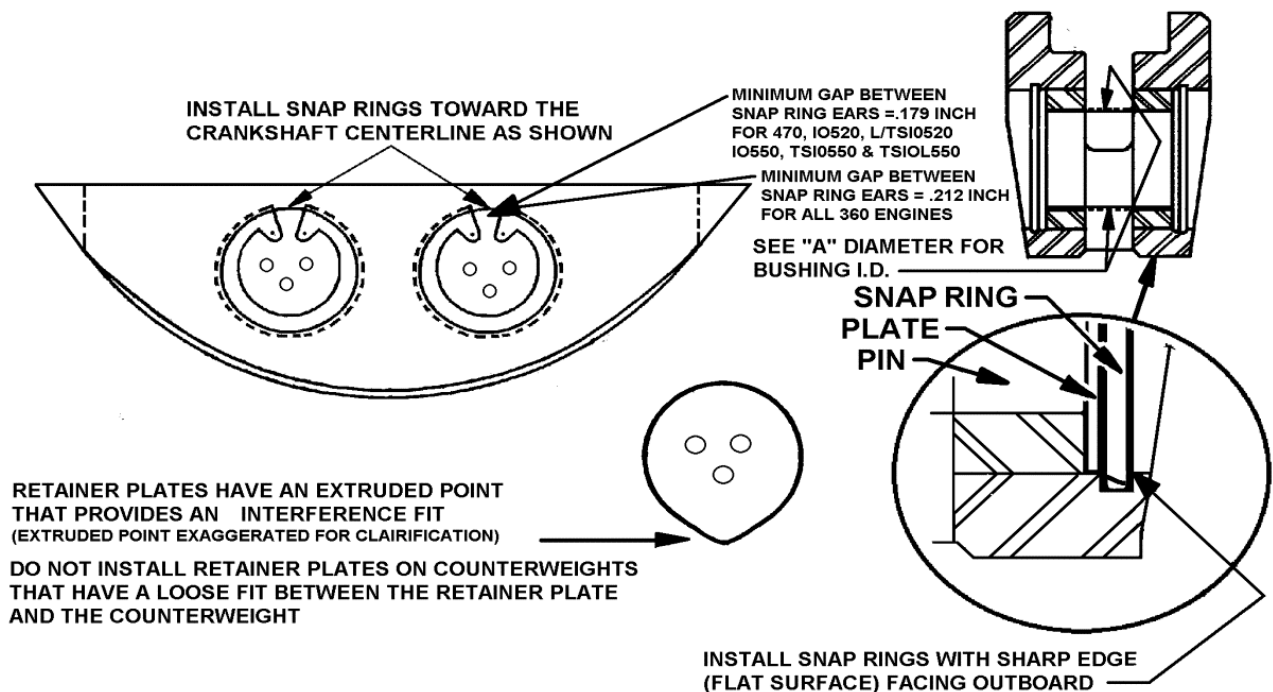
A. COUNTERWEIGHT BUSHING REPLACEMENT AND ASSEMBLY FOR 360, 470, IO-520, L/TSIO-520, IO-550, TSIO-550, TSIO550 CRANKSHAFTS
